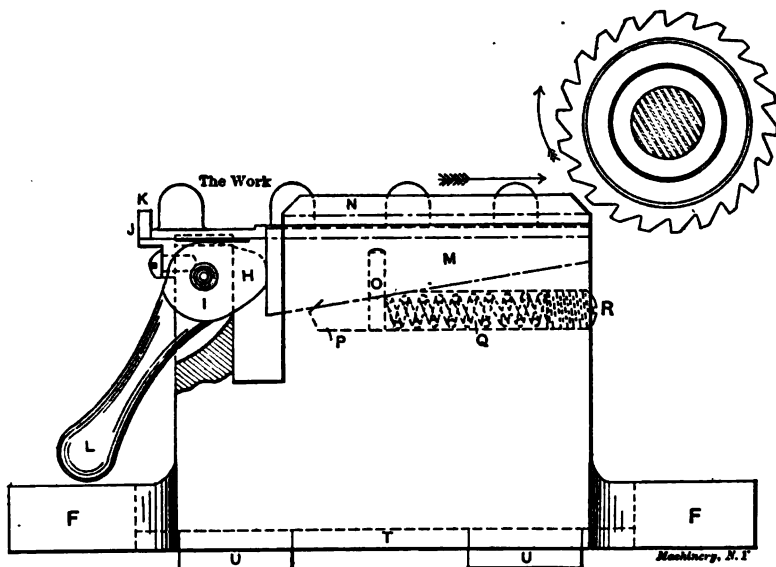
End View of Fixture, Fig. 63, with Work in Position.
